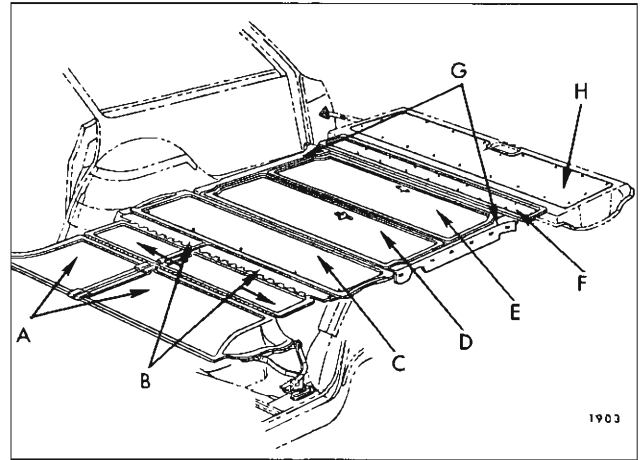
H29—Folding Seats and Floor Panels 25000 "45" Styles
